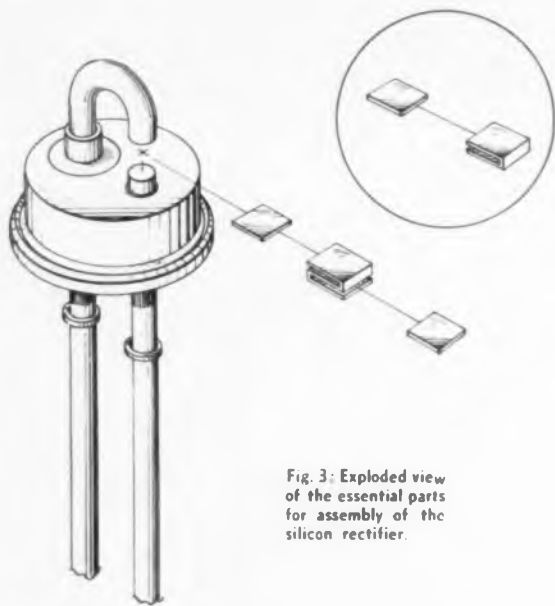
Exploded view of the essential parts for assembly of the silicon rectifier.
